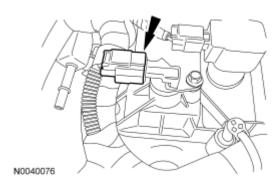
Locating Oil Filter Adapter And Bolts Courtesy of FORD MOTOR CO.
